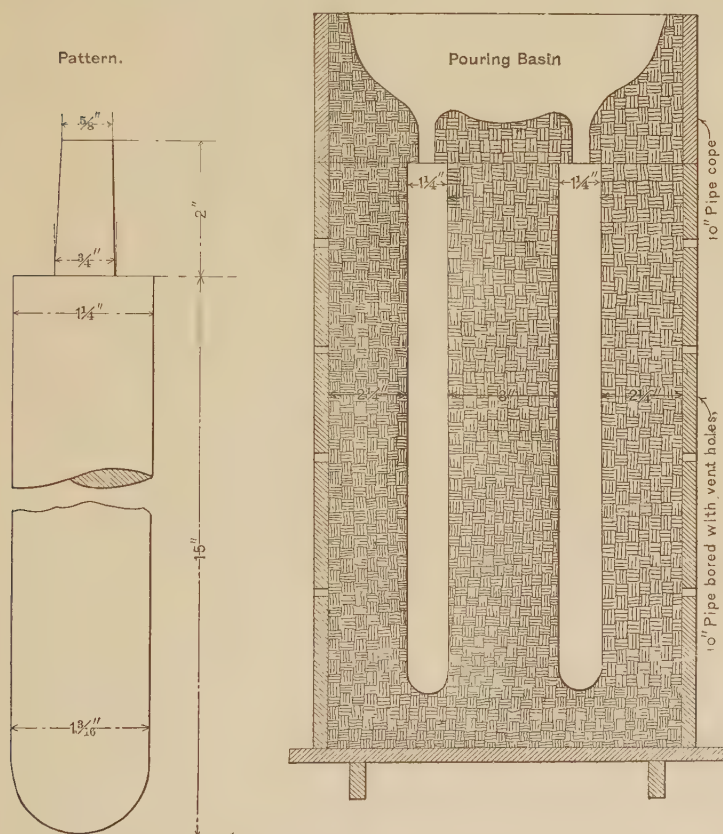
MOLD FOR ARBITRATION TEST BAR.
